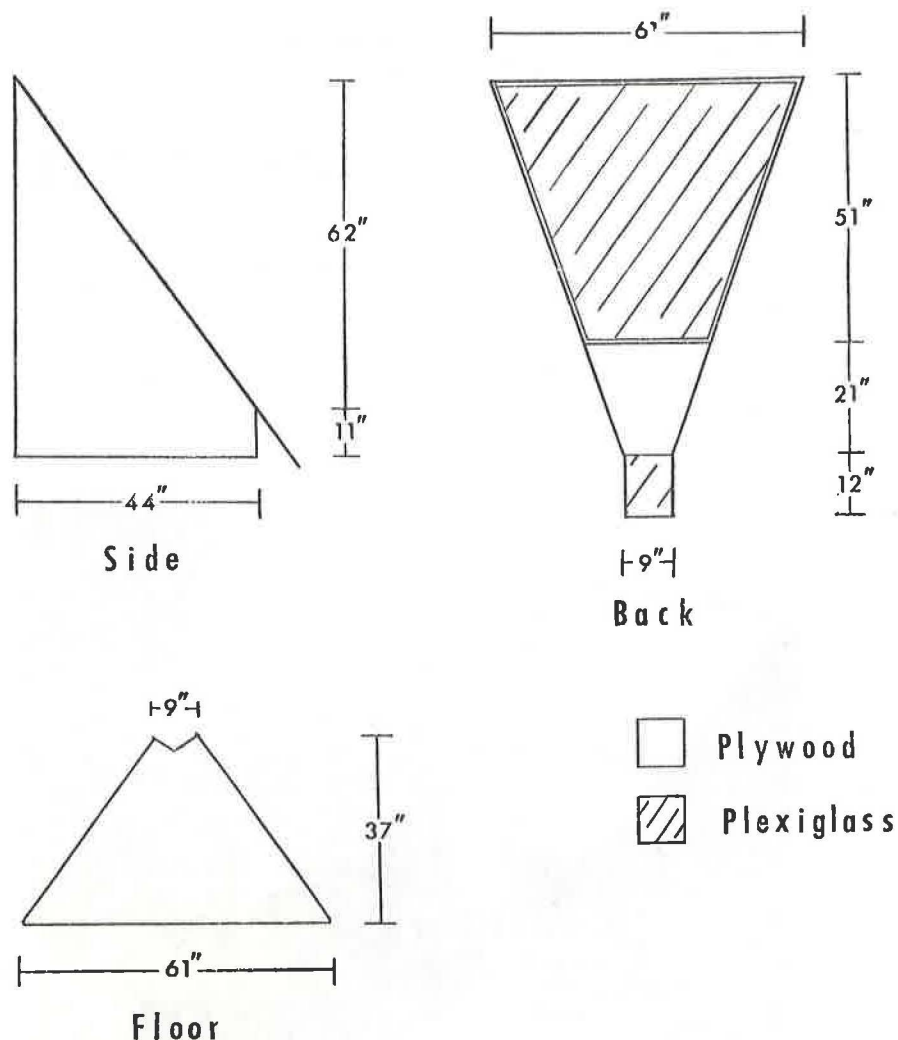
FIGURE TWO: Scale drawings with dimensions of the side, back, and floor of the funnel-scoop.
